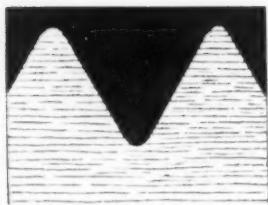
Cross section of a cut or ground thread showing the straight grain flow. The flow lines of the metal remain parallel to the axis during cutting or grinding.
